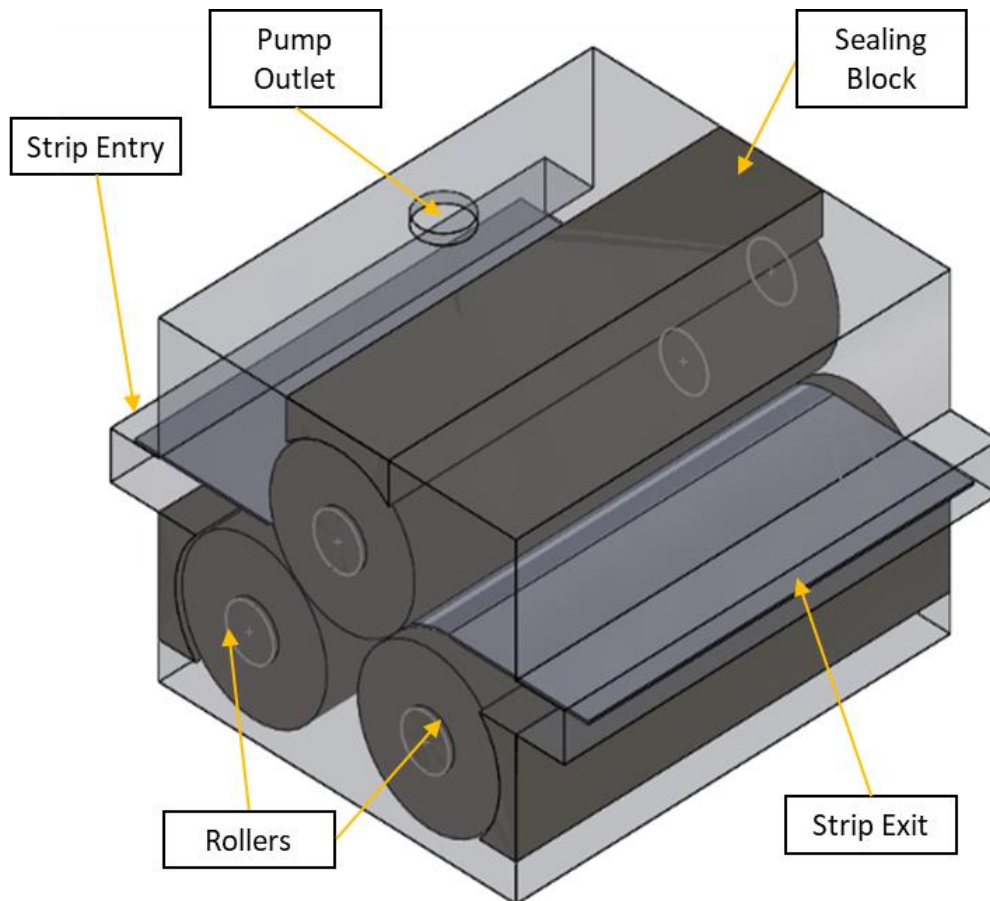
Revision 3 – Offset rollers and sealing blocks horizontal design
